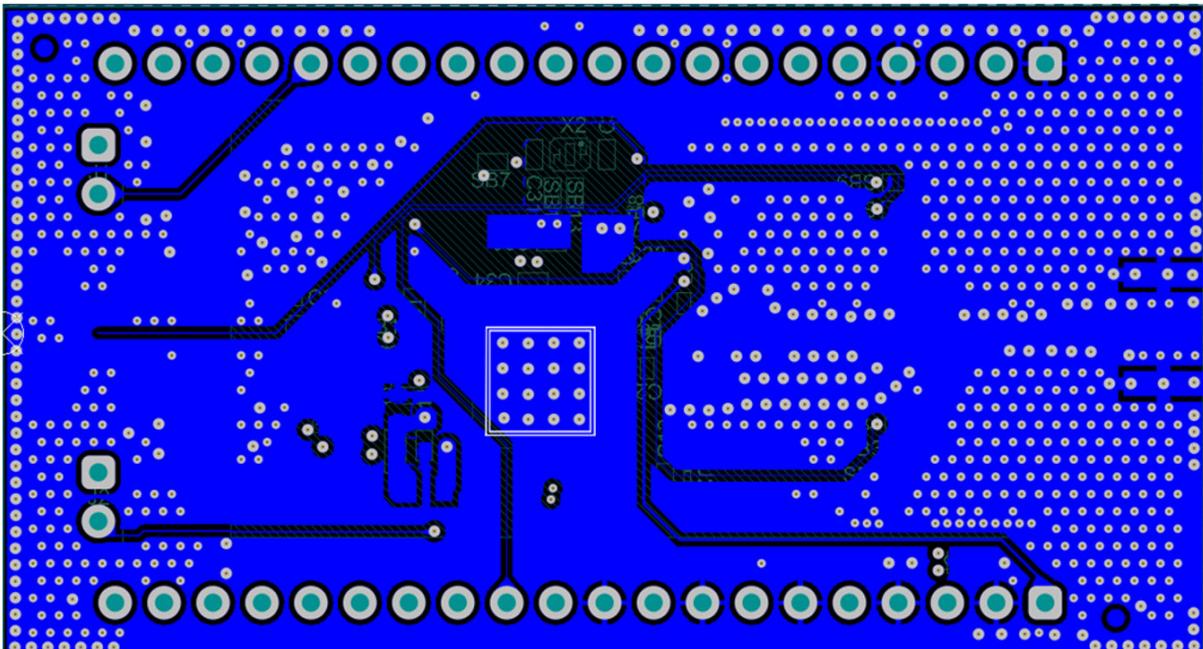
Bottom layer of the STM32WL5x/Ex reference layout for QFN
